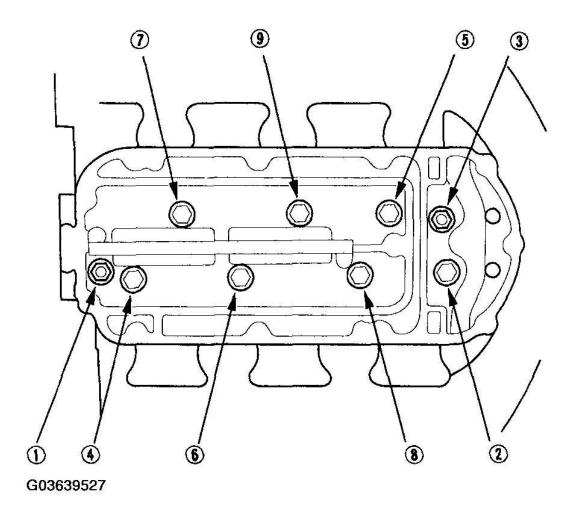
Removing Intake Manifold Mounting Bolts And Nuts In Sequence Courtesy of AMERICAN HONDA MOTOR CO., INC.
